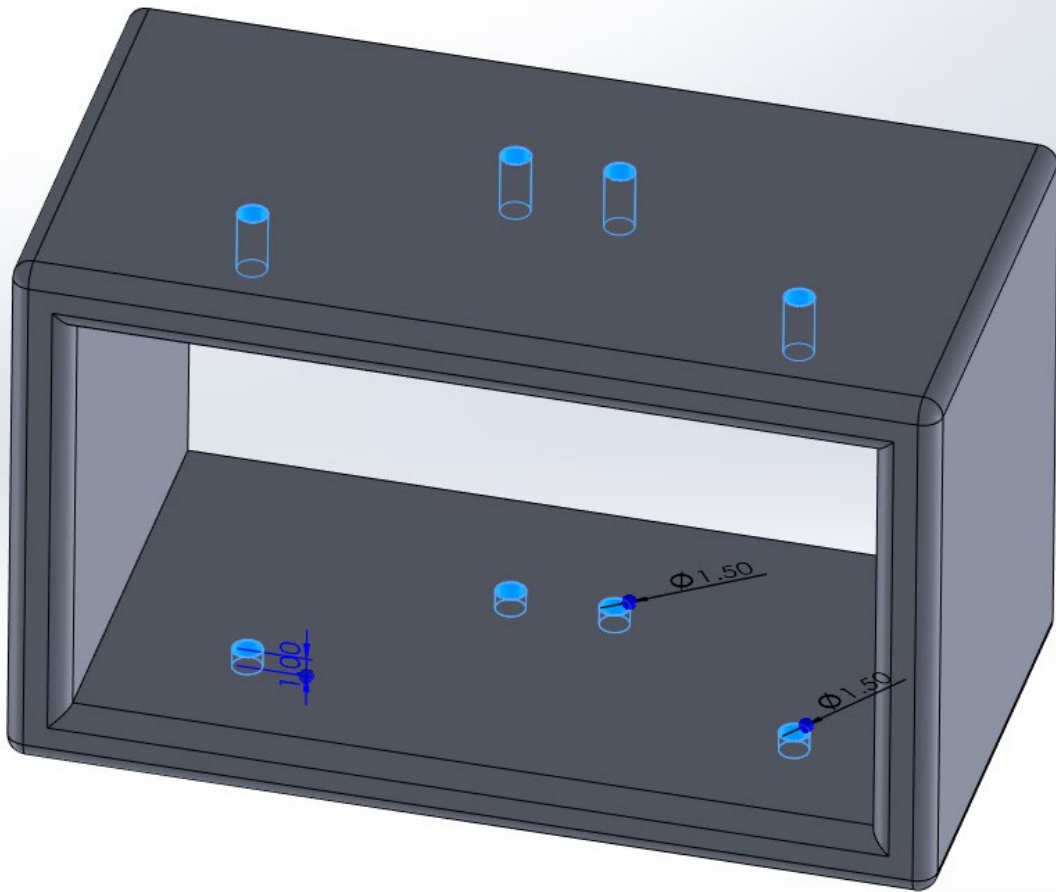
CAD drawing of Prototype 3, showing the extrusion of holes to hold the T-shape pins. The holes are 1.5 mm in diameter, extrude through the top and 1 mm to the bottom (measurement highlighted in blue). Unit in mm.
